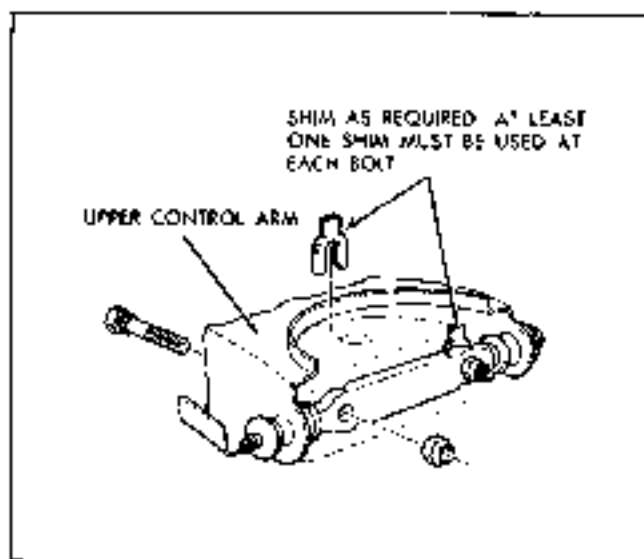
Caster - Camber Shims (Topmost Shown)
